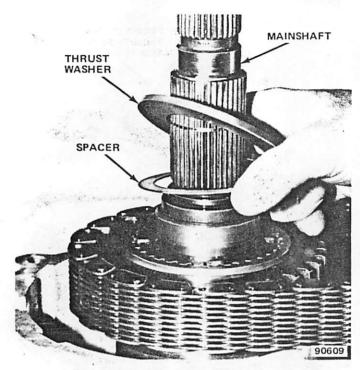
D-14 Drive Sprocket Thrust Washer and Spacer Removal/Installation
